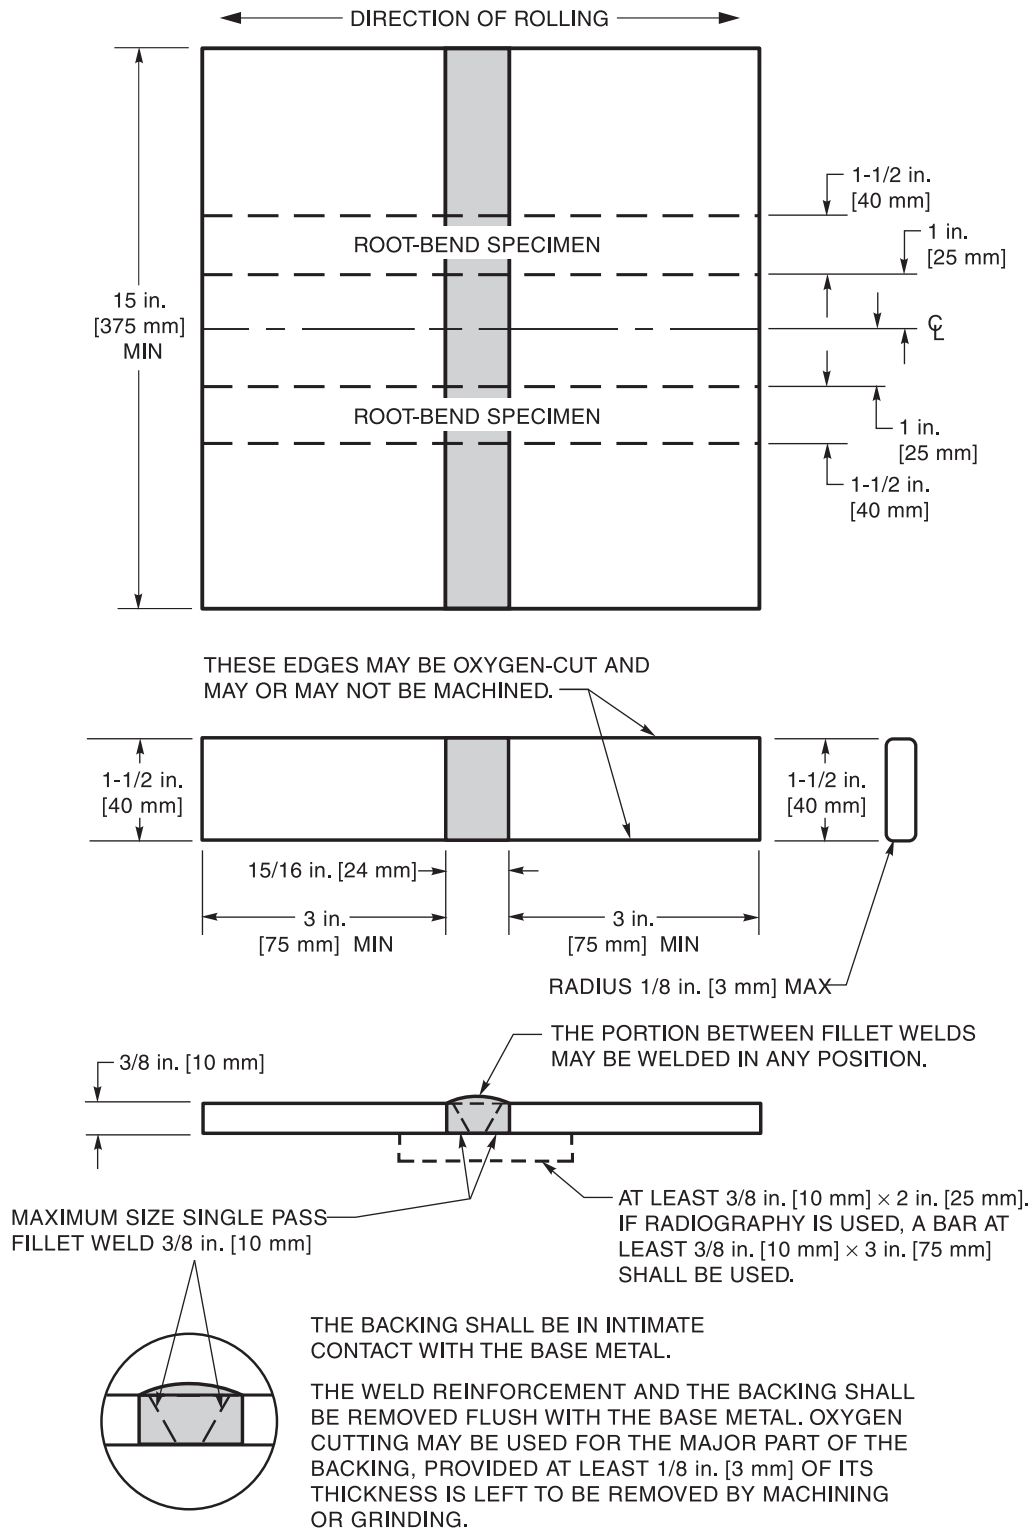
Fillet Weld Root-Bend Test Plate—Welding Operator Qualification, Option 2
